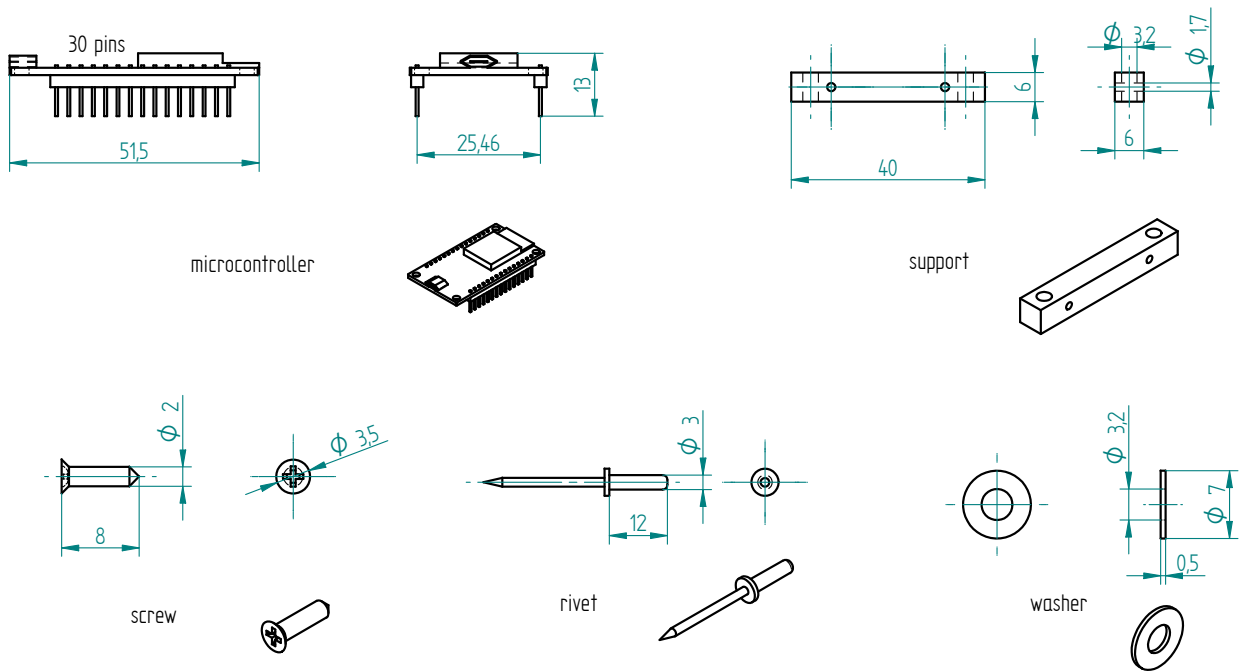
power unit p/housing/microcontroller parts drawing
